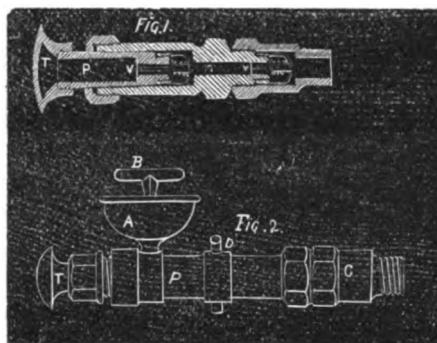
shows a form which is used horizontally. It has but one valve which is in case C, the same as in Fig. 1.
